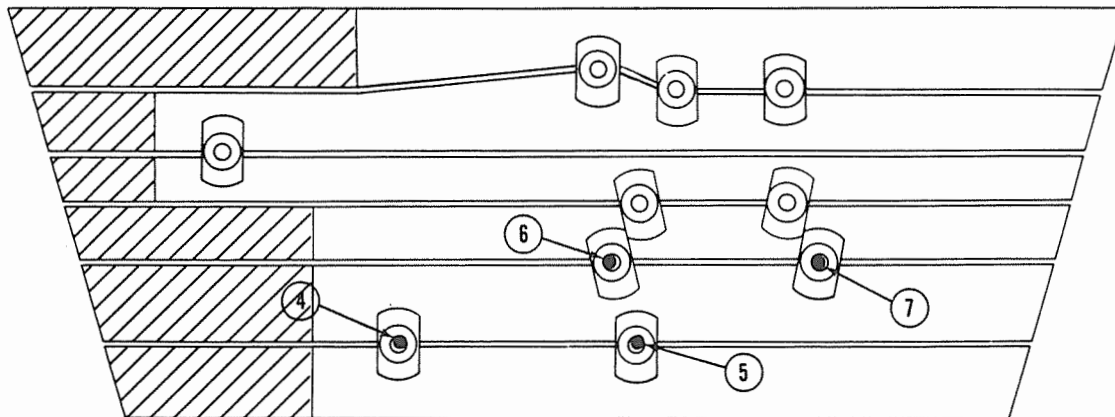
(Sheet 1 of 7 Sheets). Aileron and Aileron Geared Tab Control System - Key Drawing
